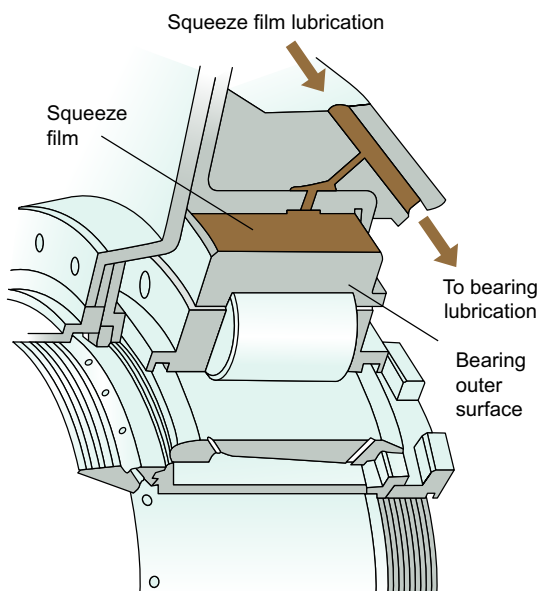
The squeeze film damper reduces vibration transmission to the engine structure and reduces loads on the shaft due to flexing of the engine casings. (Source: Rolls Royce.)
